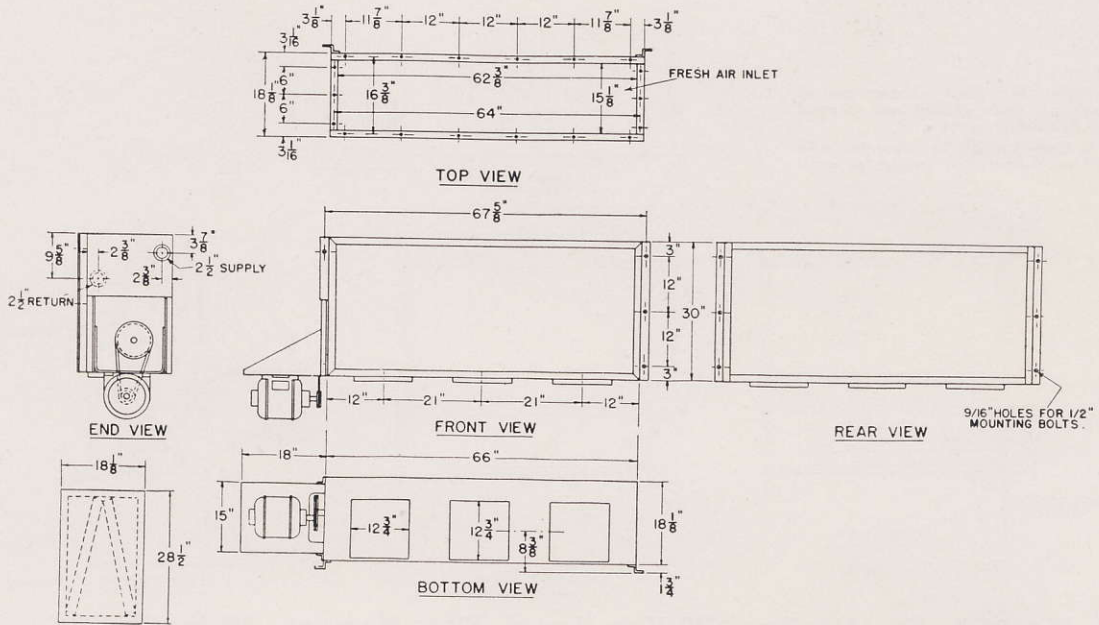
No. 1866 Type "R" Unit Heater. Inverted Wall Mounting.
